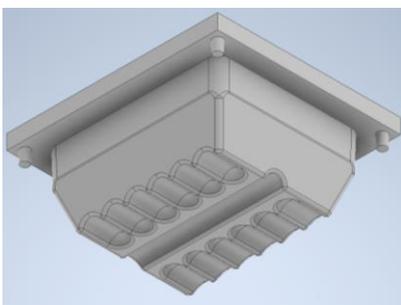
Aluminium Moulds - 0046-DE-CAD-005 - 120X100X50 TRAY LID
